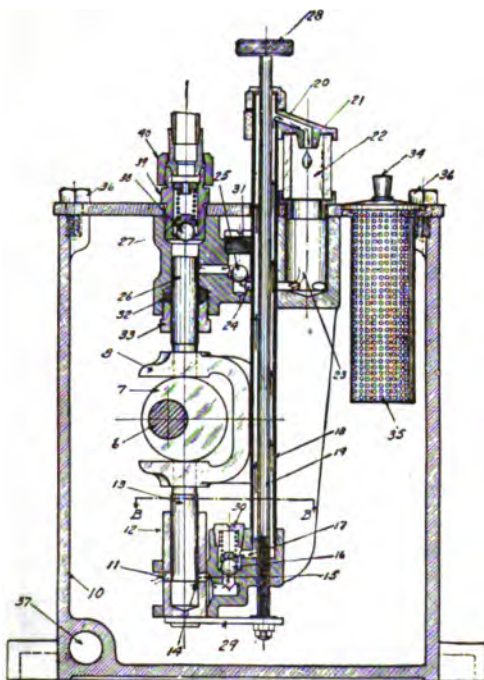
SEC. 10nn.—Sectional view of a Phenix forced-feed lubricator body and a pumping unit.
